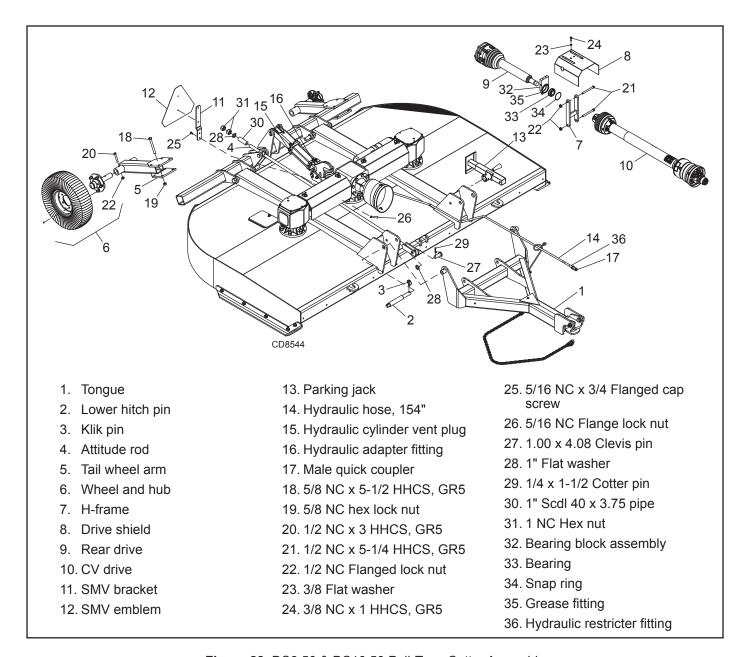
DS8.50 & DS10.50 Pull-Type Cutter Assembly
